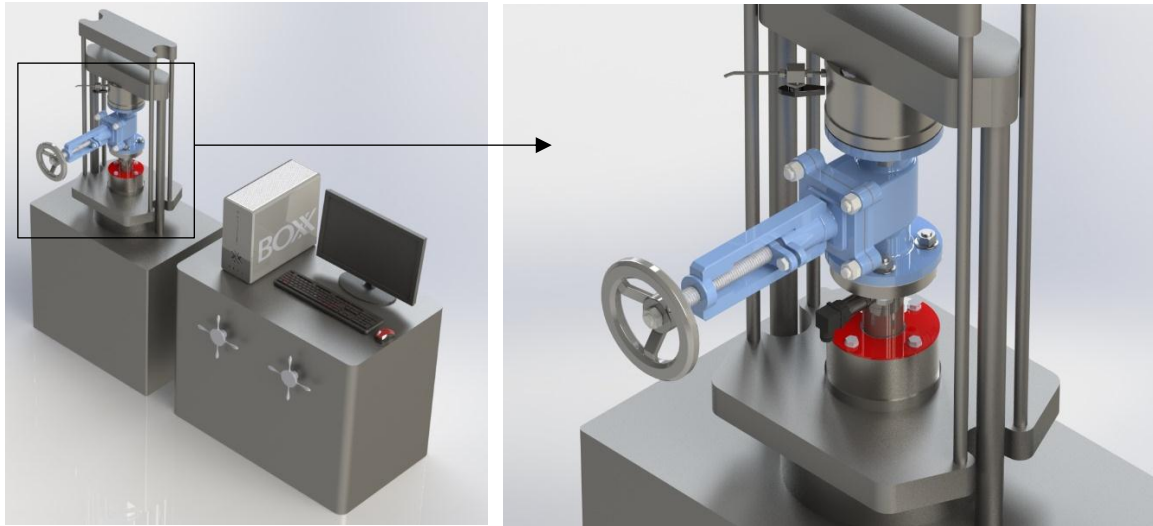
Figure representing the designed subassemblies, together with a test valve lodged between these subassemblies
